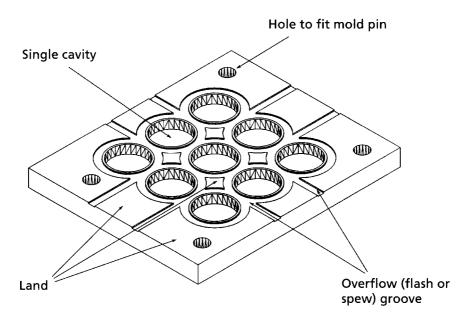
The bottom half of a nine cavity mold (courtesy of the Holz Rubber Company)
